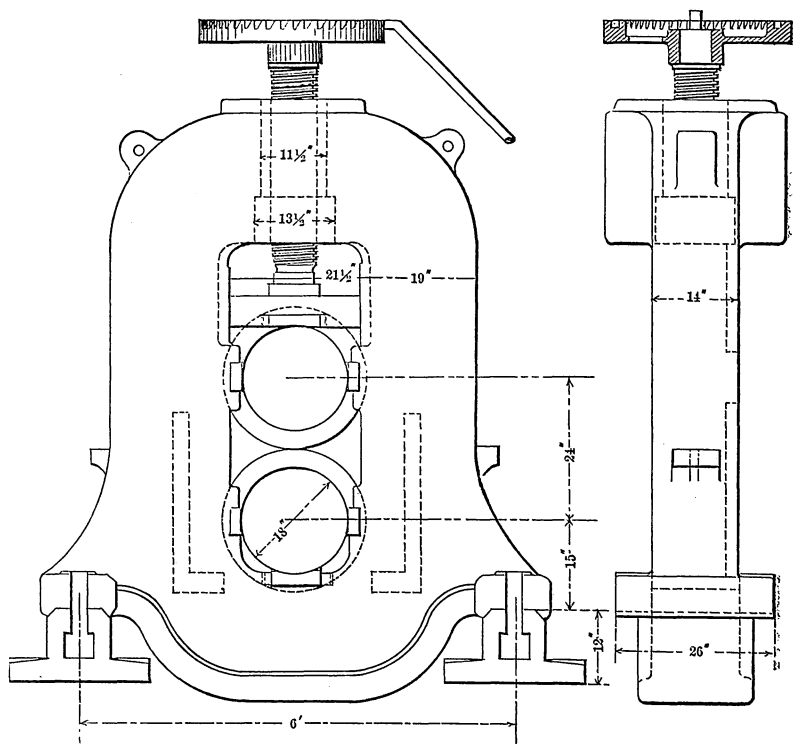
Sheet Mill Housing, Lewis Design, 1893.—24-Inch Rolls.—Weight, 19,500 Pounds.
